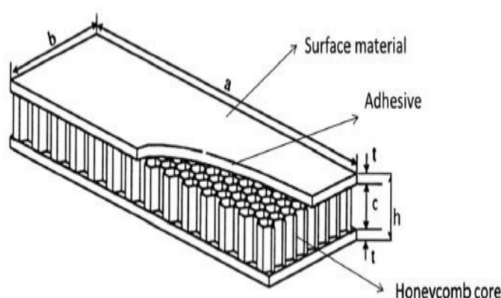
Honeycomb (sandwich) geometric mold structure.²⁴
